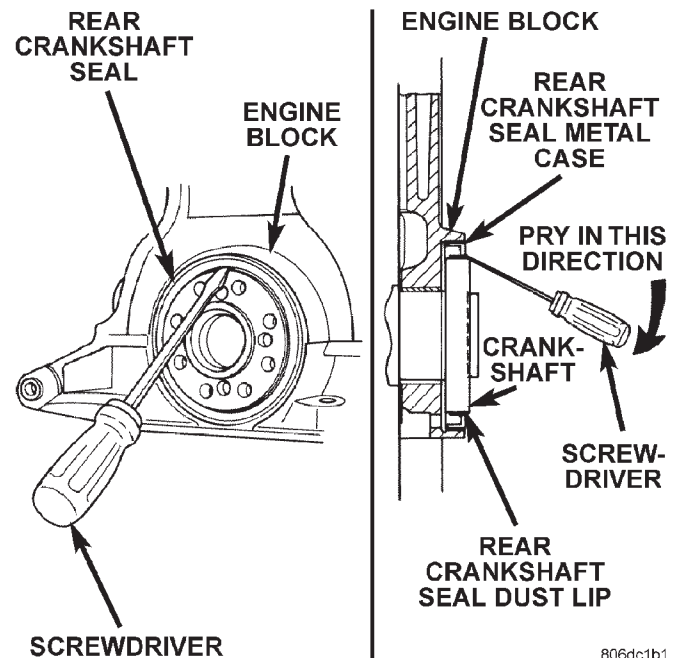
Rear Crankshaft Oil Seal—Removal
